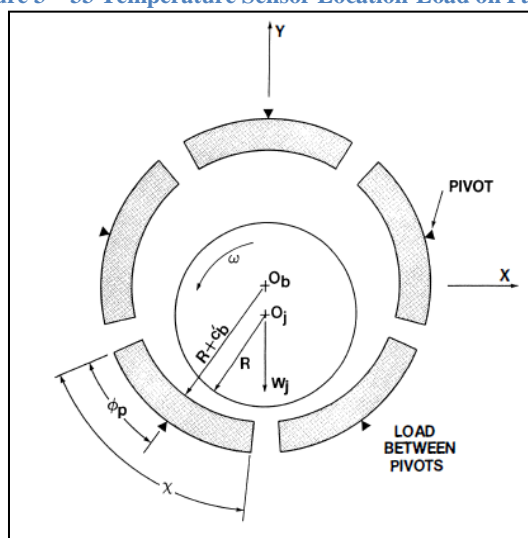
34 Tilting Pad Bearing-Load Between Pivots. [8]
